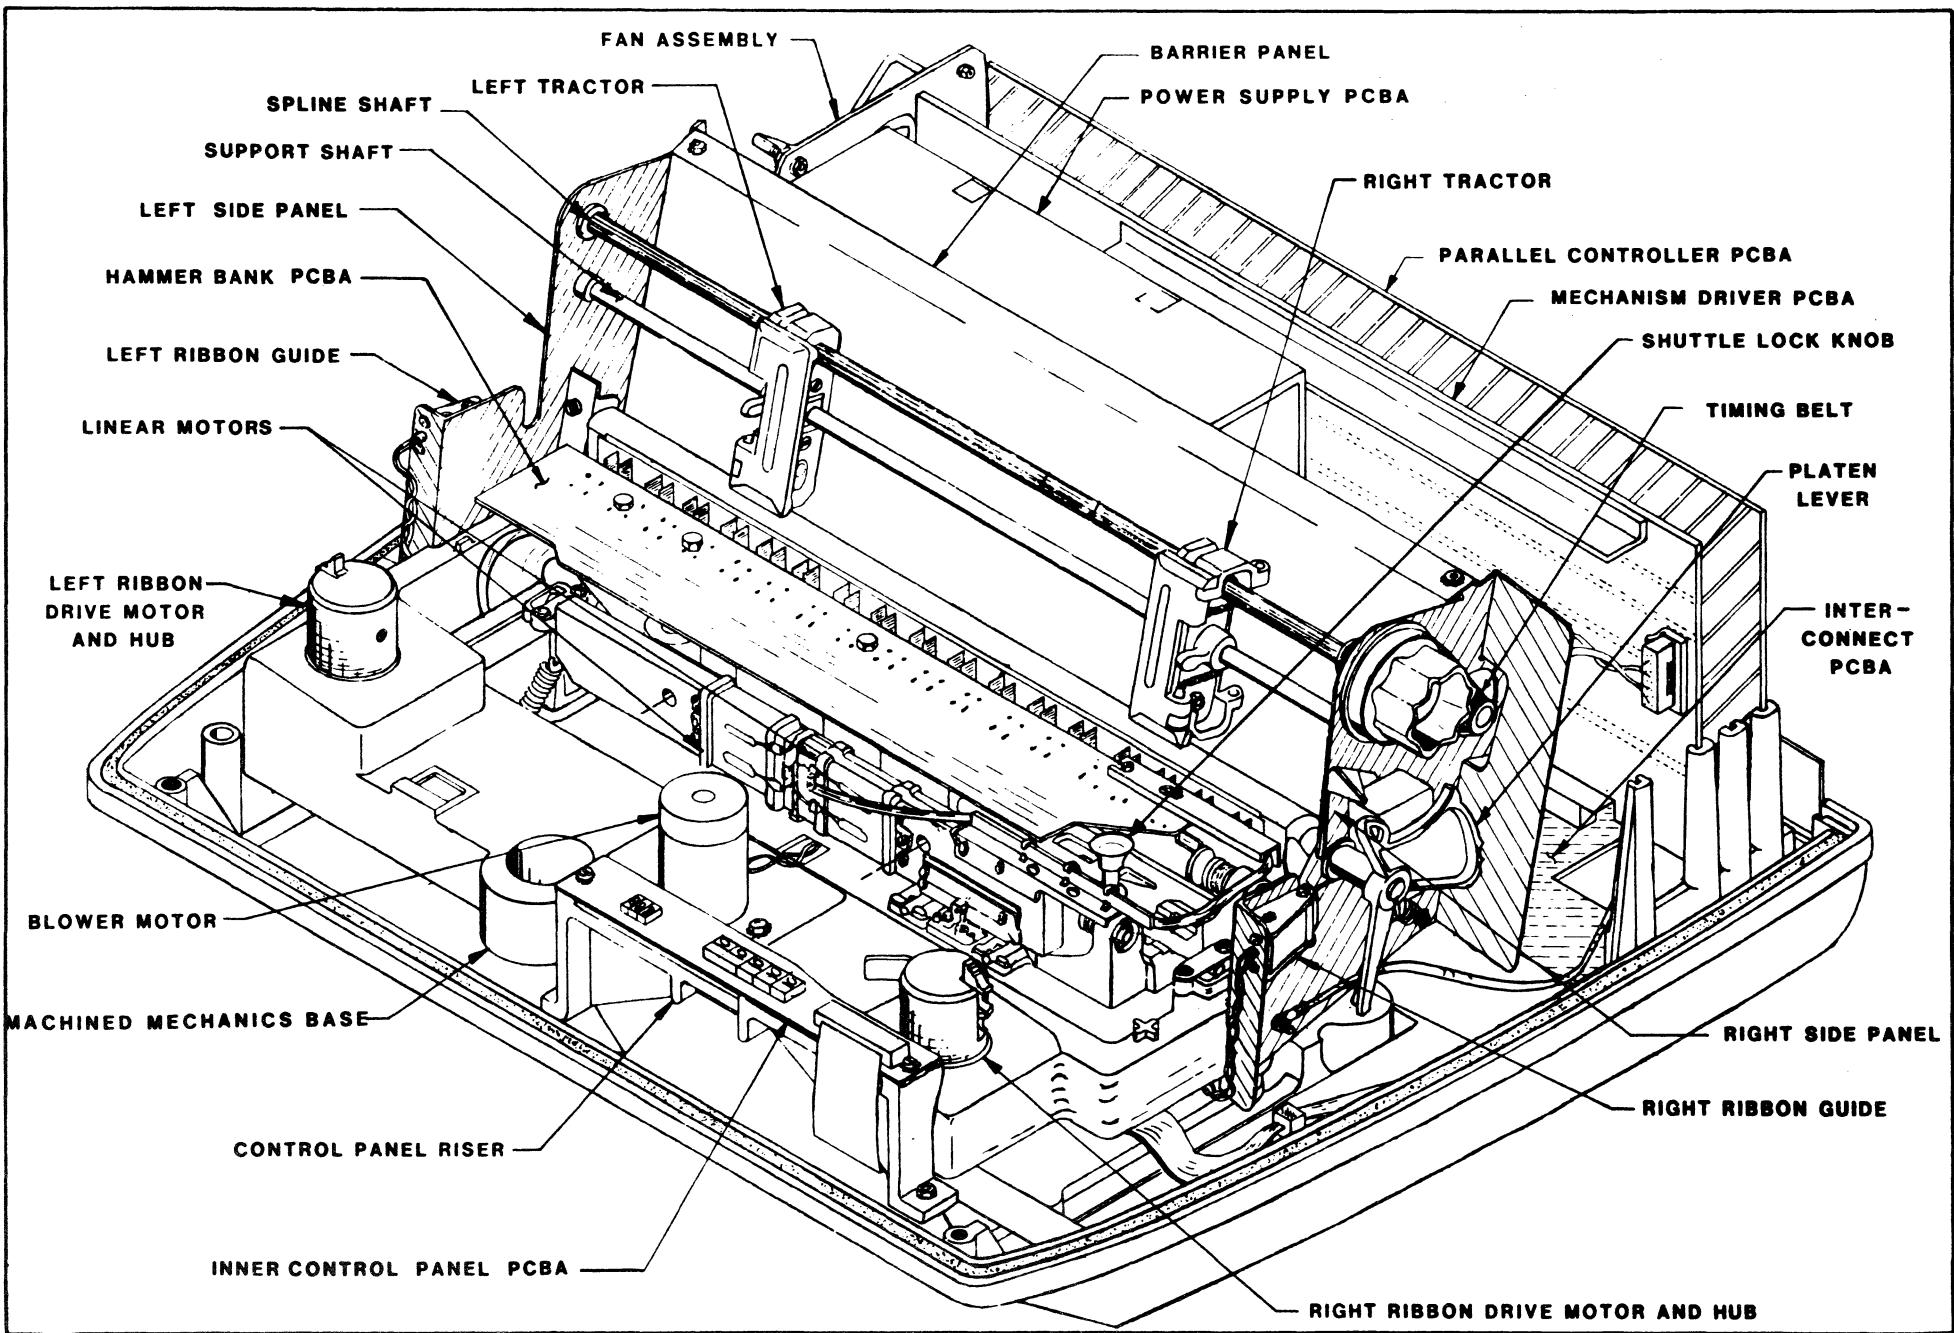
The MVP Printer, Cabinet Housing and Shuttle Cover Removed
